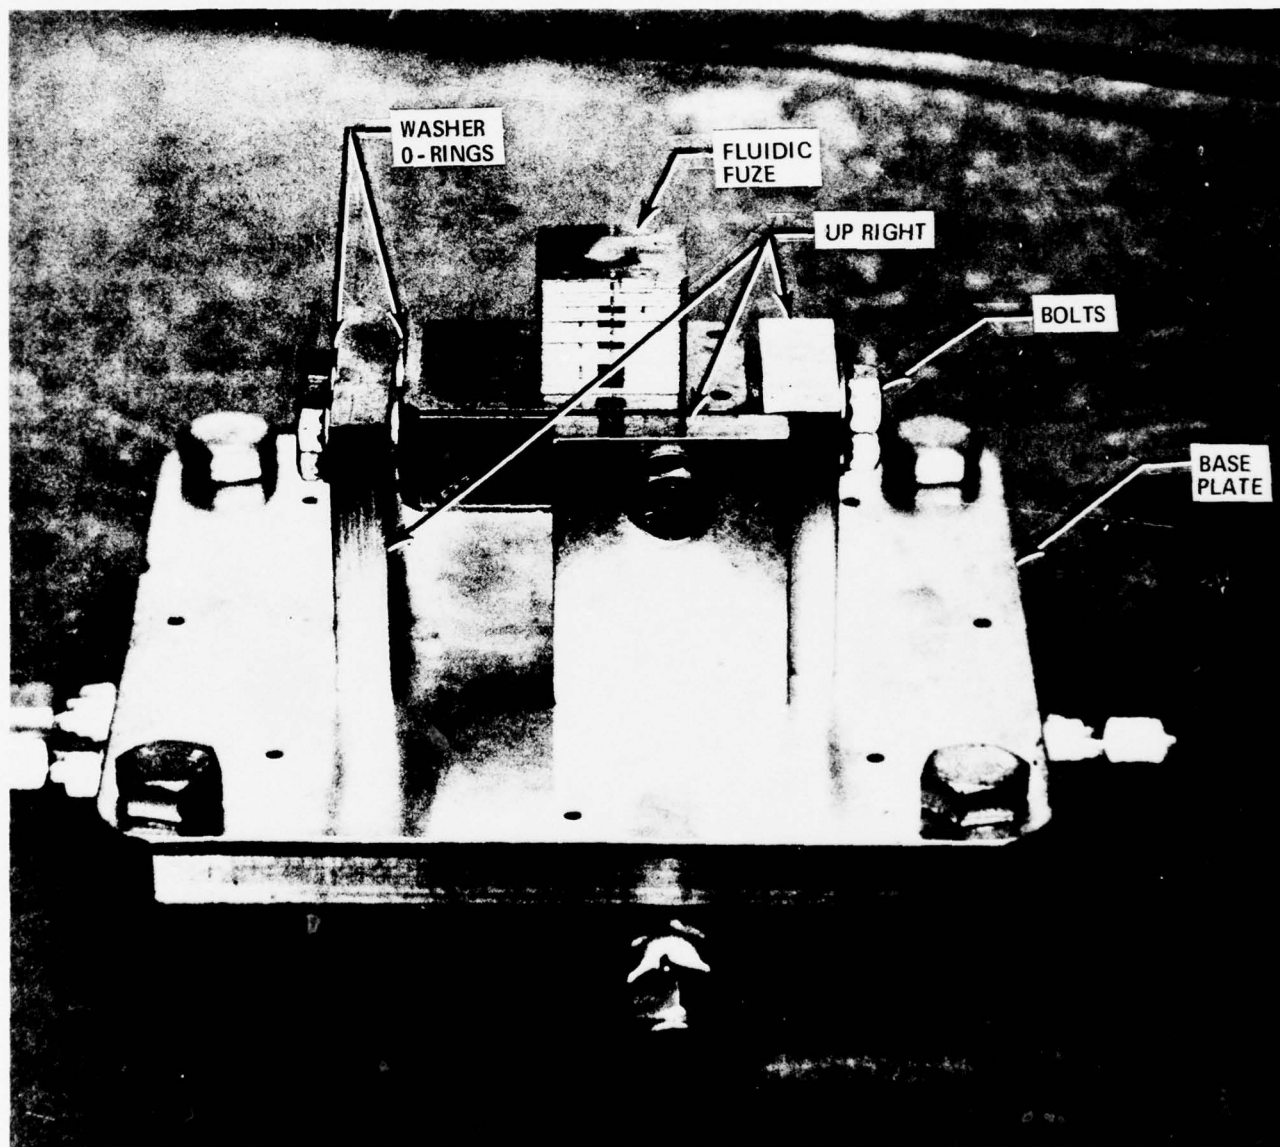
FLUIDIC FUZE MOUNTED ON TEST FIXTURE
